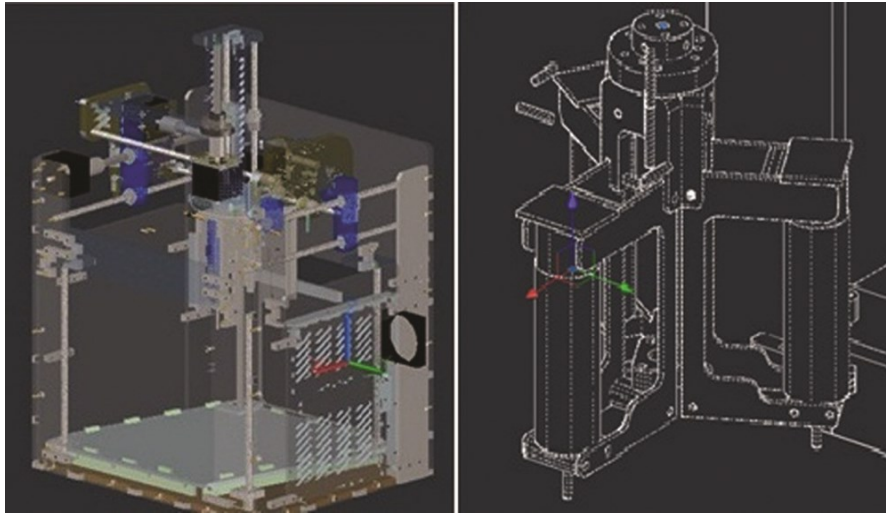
Structure assembly: (L) The whole mechanism; (R) Food deposition component.
